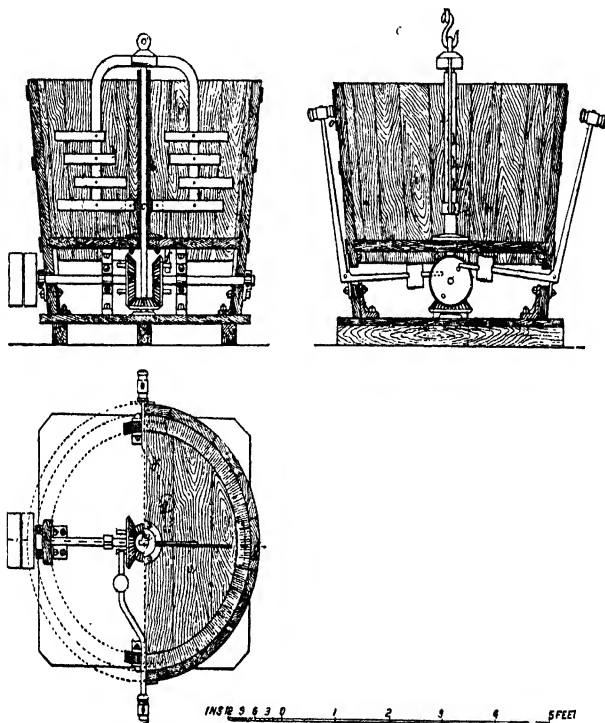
Mechanical dolly-tub. Plan, vertical section and elevation.
